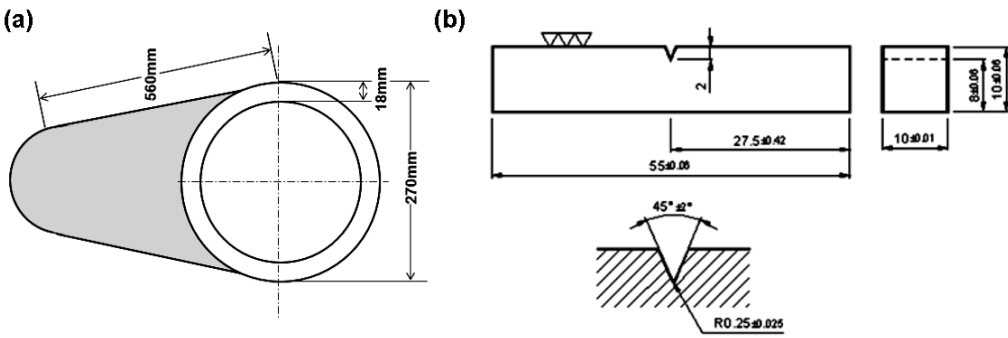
Schematic of pipe size and Charpy V-notch impact specimen (a) pipe size (b) single-notch
